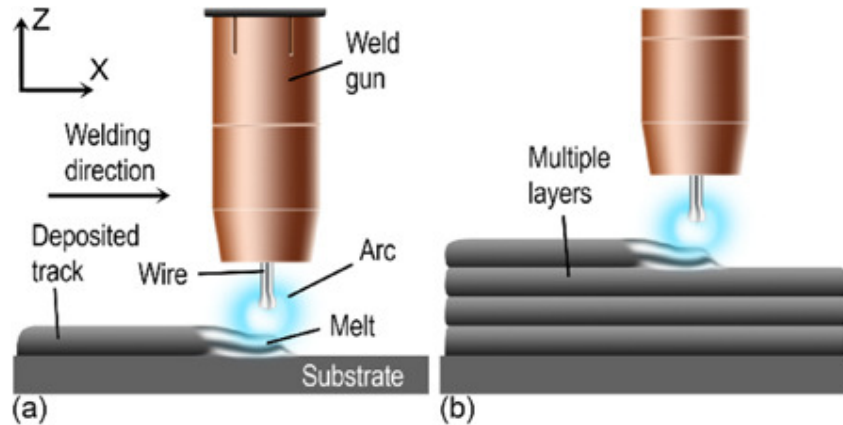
demonstrates the laser wire arc welding of additive manufacturing [15].
